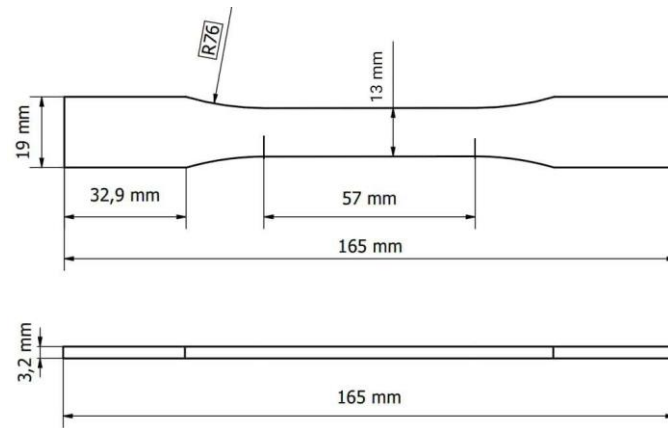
Tensile Test Specimens Designed Based on ASTM D638 TYPE 1.
